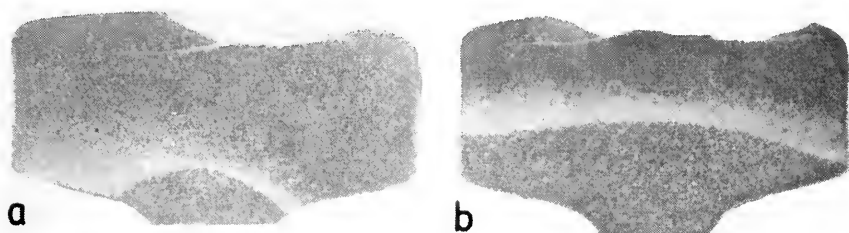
Two welded engine burns that failed. Etched in ammonium persulfate solution. Note horizontal cracks under weld metal.
